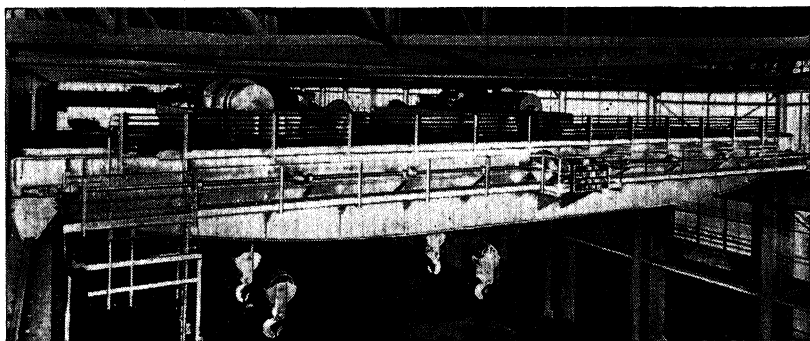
Traveling crane of 200-ton capacity and 100 ft. span of arc welded steel construction. Used in the plant of a large Diesel locomotive manufacturer.
